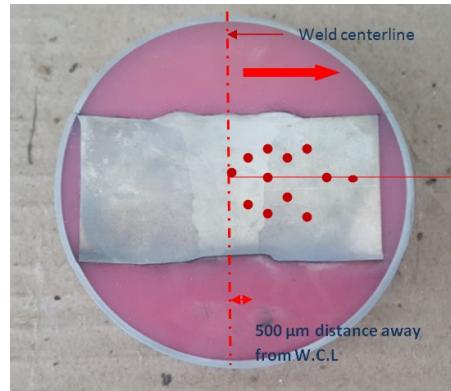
Shows the location of welded coupon micro hardness hardness at 12 locations away from the weld center lne.
